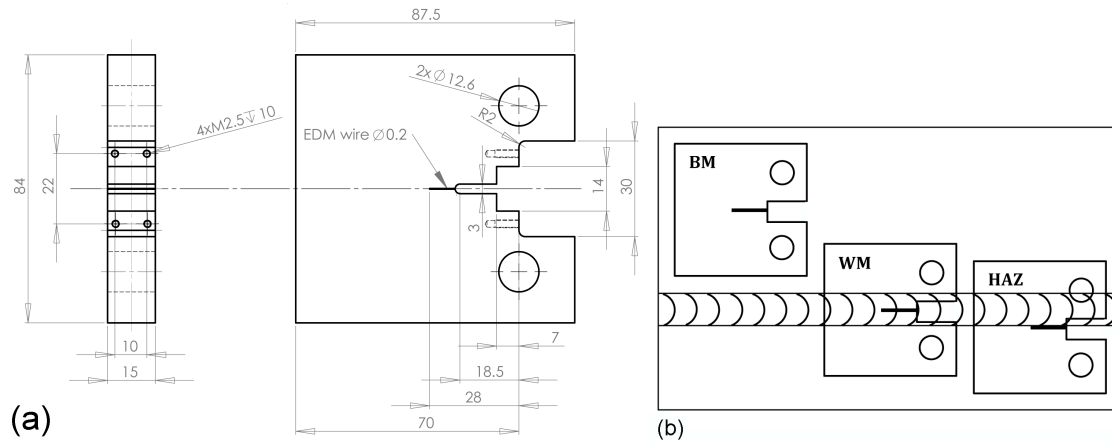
(a) Geometry of C(T) specimens used in this study. (b) Extraction scheme from the welded plates.
